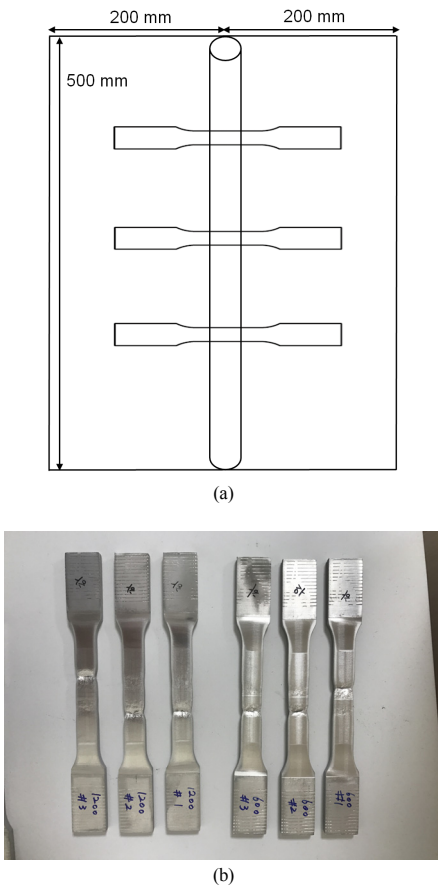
(a) Dimensions of parent weld plate, and location of the specimens for tensile test, and (b) the specimens used for tensile tests.
